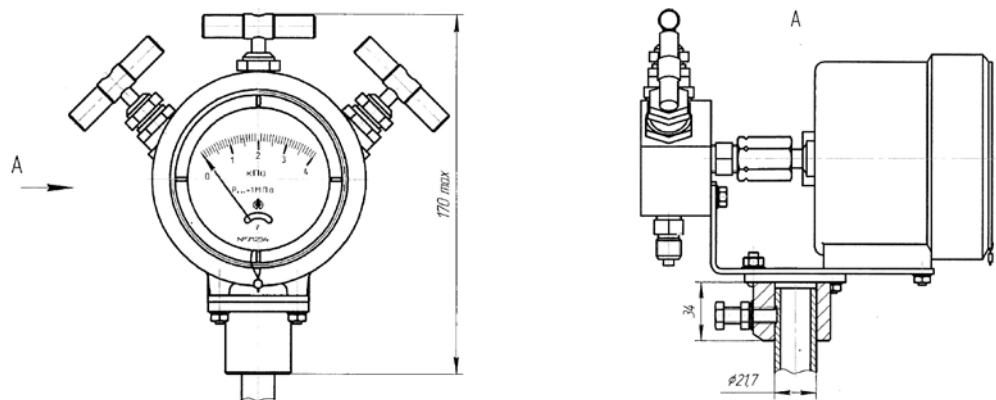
Overall and attachment dimensions of the ДСП-80B PACKO differential pressure gauge with a bracket
